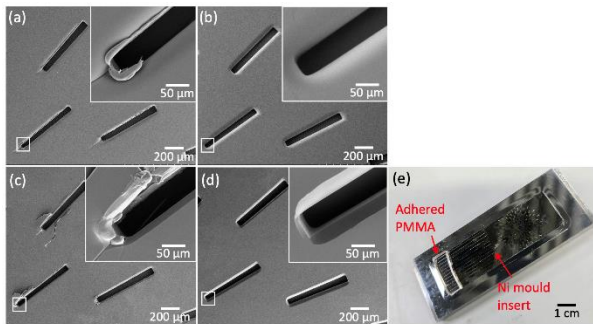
Surface morphology of injection moulded PMMA from Ni mould with a mould temperature of 50°C (a), and from Ni-PTFE mould (b); with a mould temperature of 100/40°C from Ni mould (c) and Ni-PTFE mould (d); (e) image of PMMA adhered to pure Ni mould insert after demoulding at mould temperature of 100/40°C.
